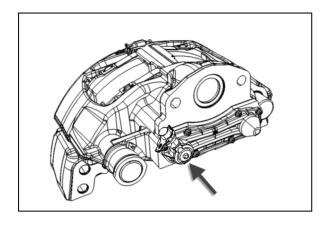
BRAKE PAD WEAR CHECK ON FRONT AND TAG AXLE
